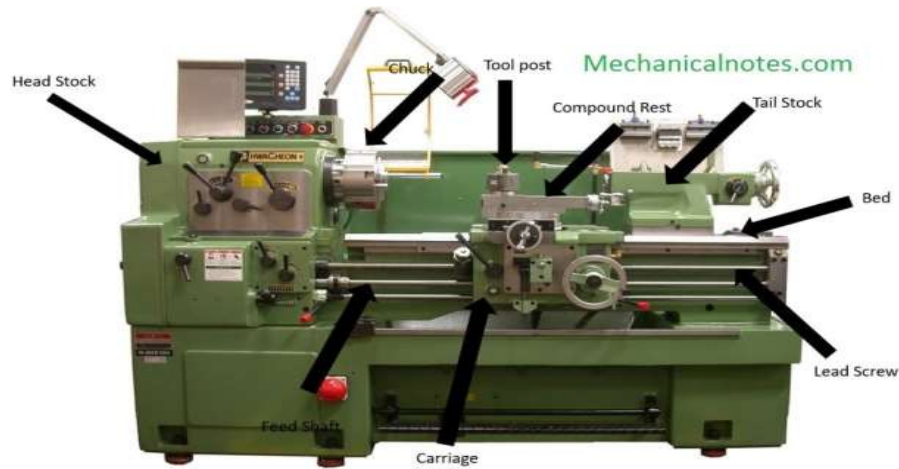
Diagram showing the center lathe [Mechanical Notes].
